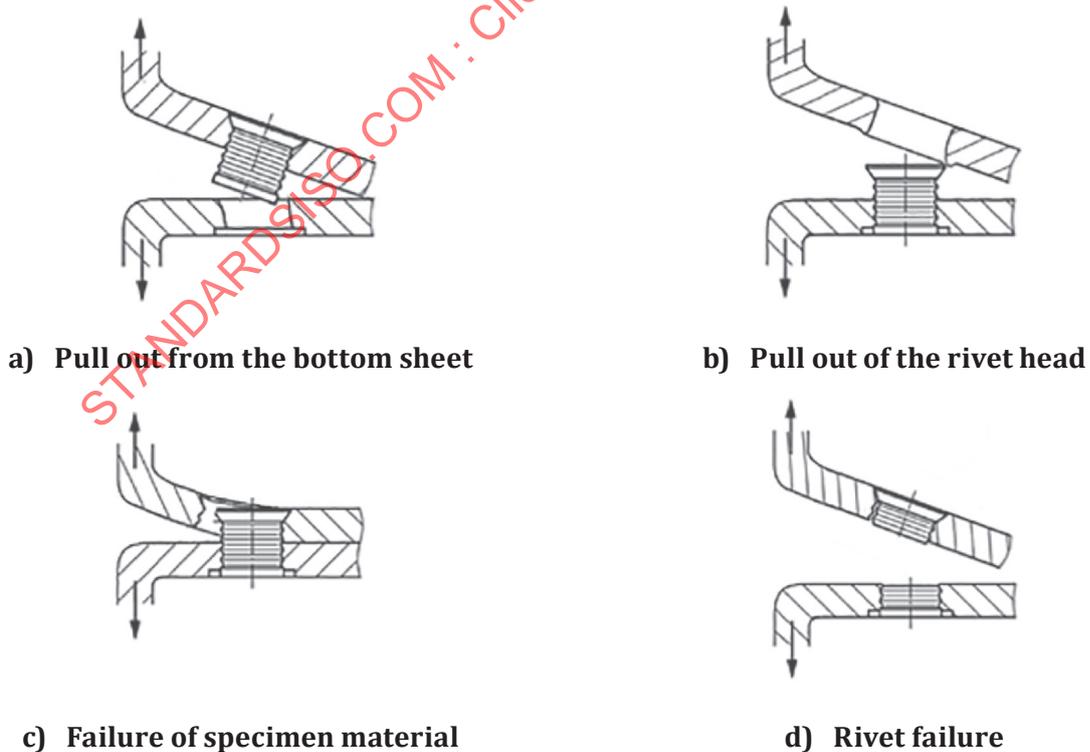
Typical failure modes of solid self-piecing rivet joints
